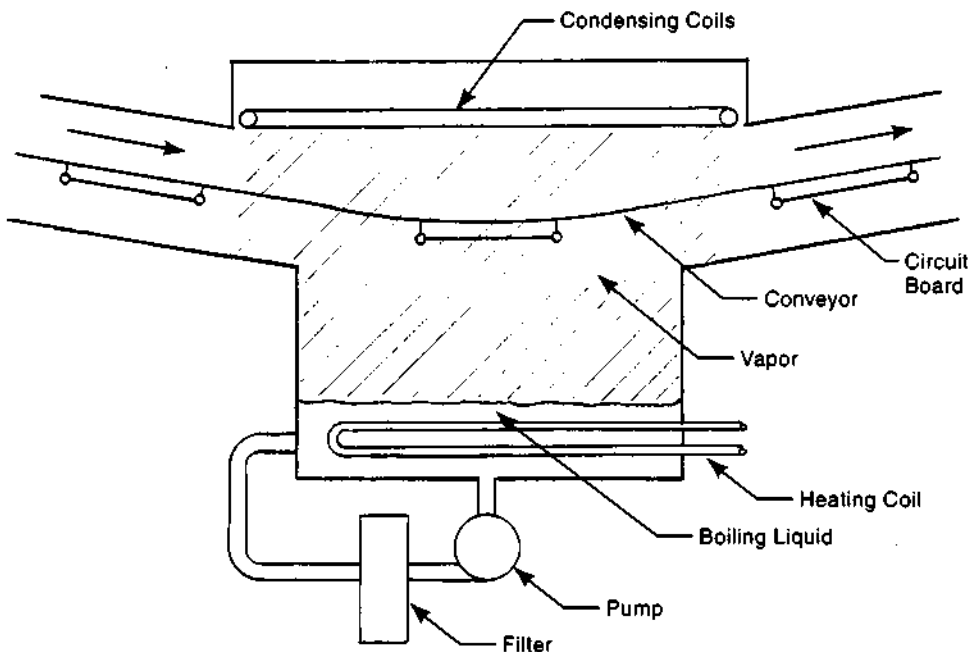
C6b Schematic view of a continuous processing setup for vapor-phase reflow soldering.
